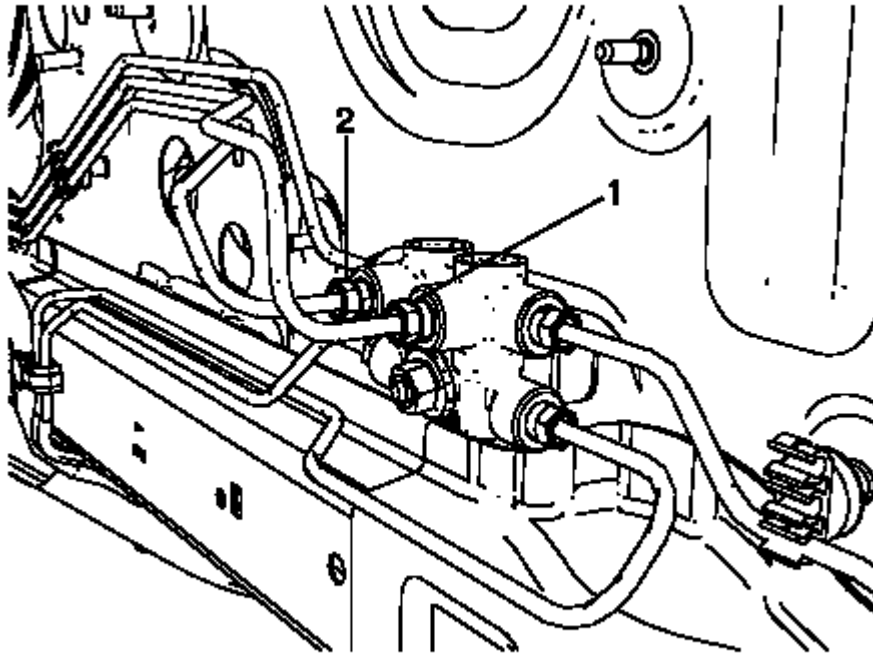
Master Cylinder Primary Inlet Brake Pipe Fitting
